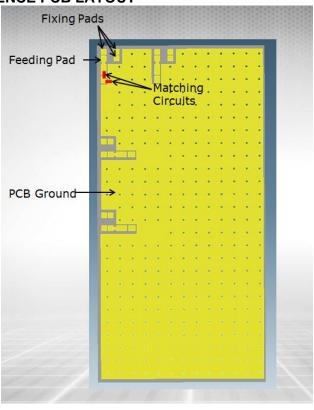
RECOMMENDED PCB LAYOUT (Note: PCB size of 100 mm x 50 mm x1mm)
